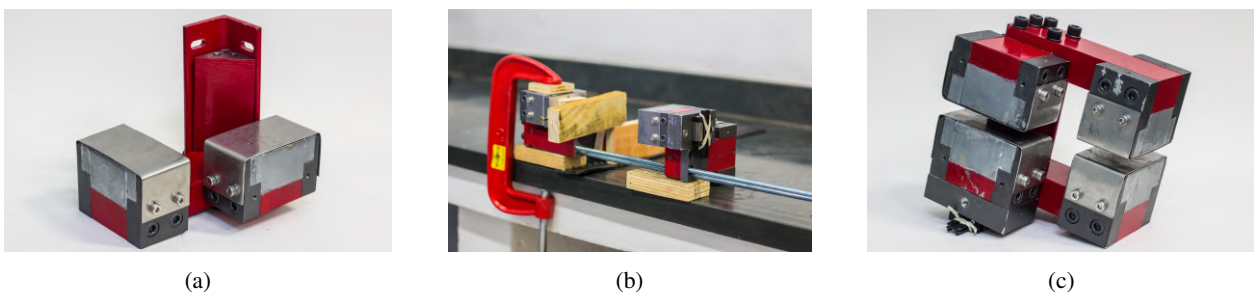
Final L-shape structure assembly: (a) triangle steel part used to connect the two L-shape structures (upper and lower); (b) Approximation of the parts; (c) Finished L-shape structure with two magnetic poles.
